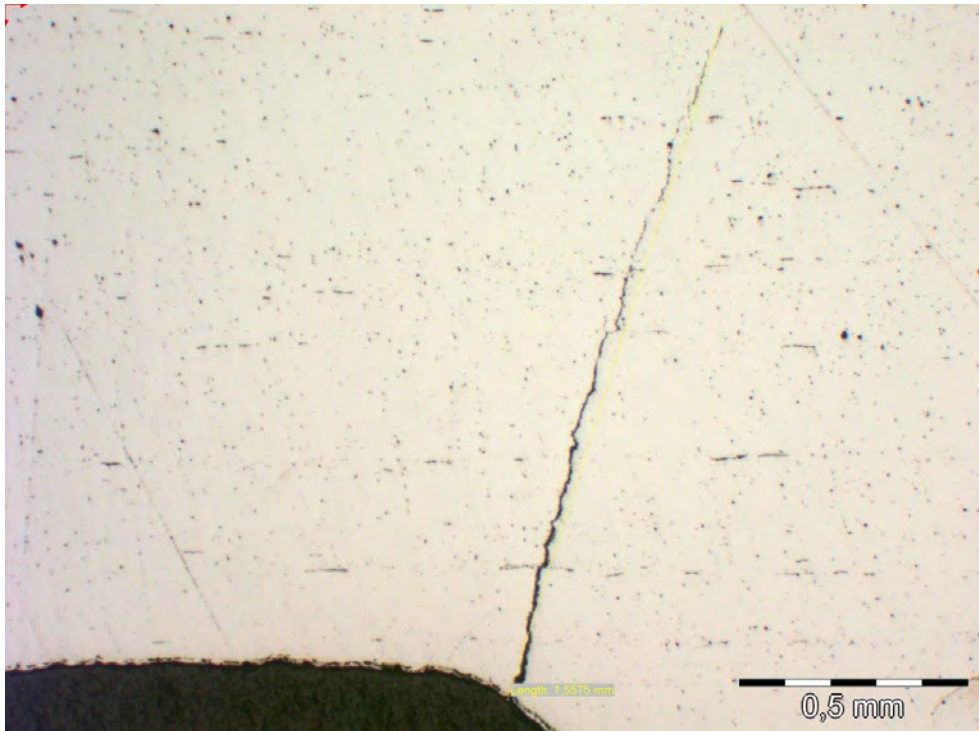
Cut five in crack at segment A, first ridge on barrel no. 14389
